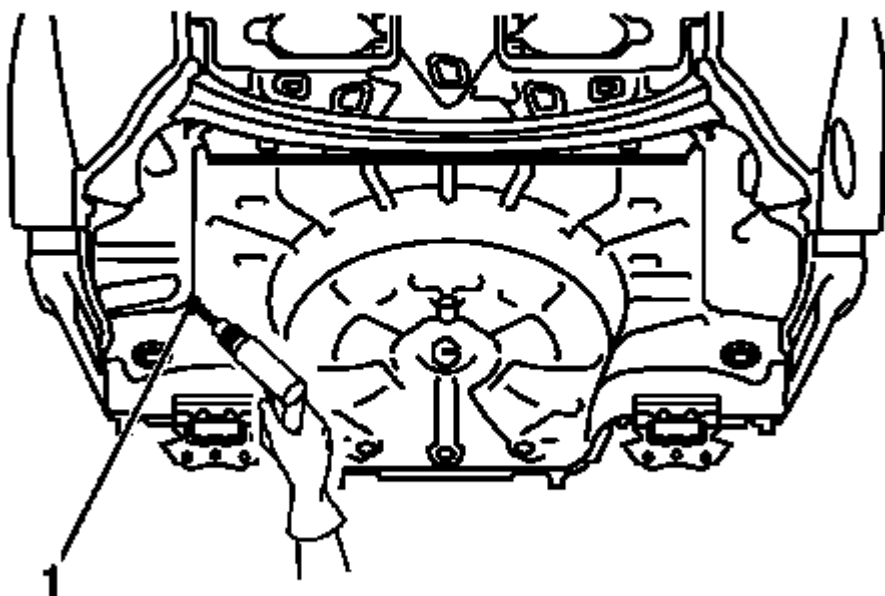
Drilling Out Rear Compartment Floor Panel Spot Welds
